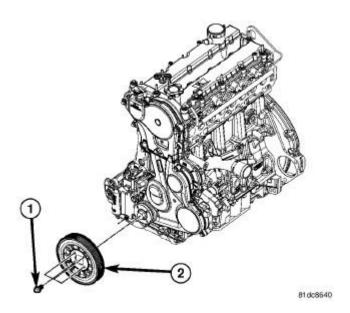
Crankshaft Damper Courtesy of CHRYSLER LLC
